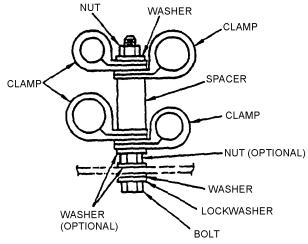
Wire Harness Clamping for 1 or 2 Harrness
